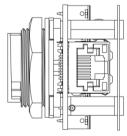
Patch Board Mk1 Dimensions (mm)
